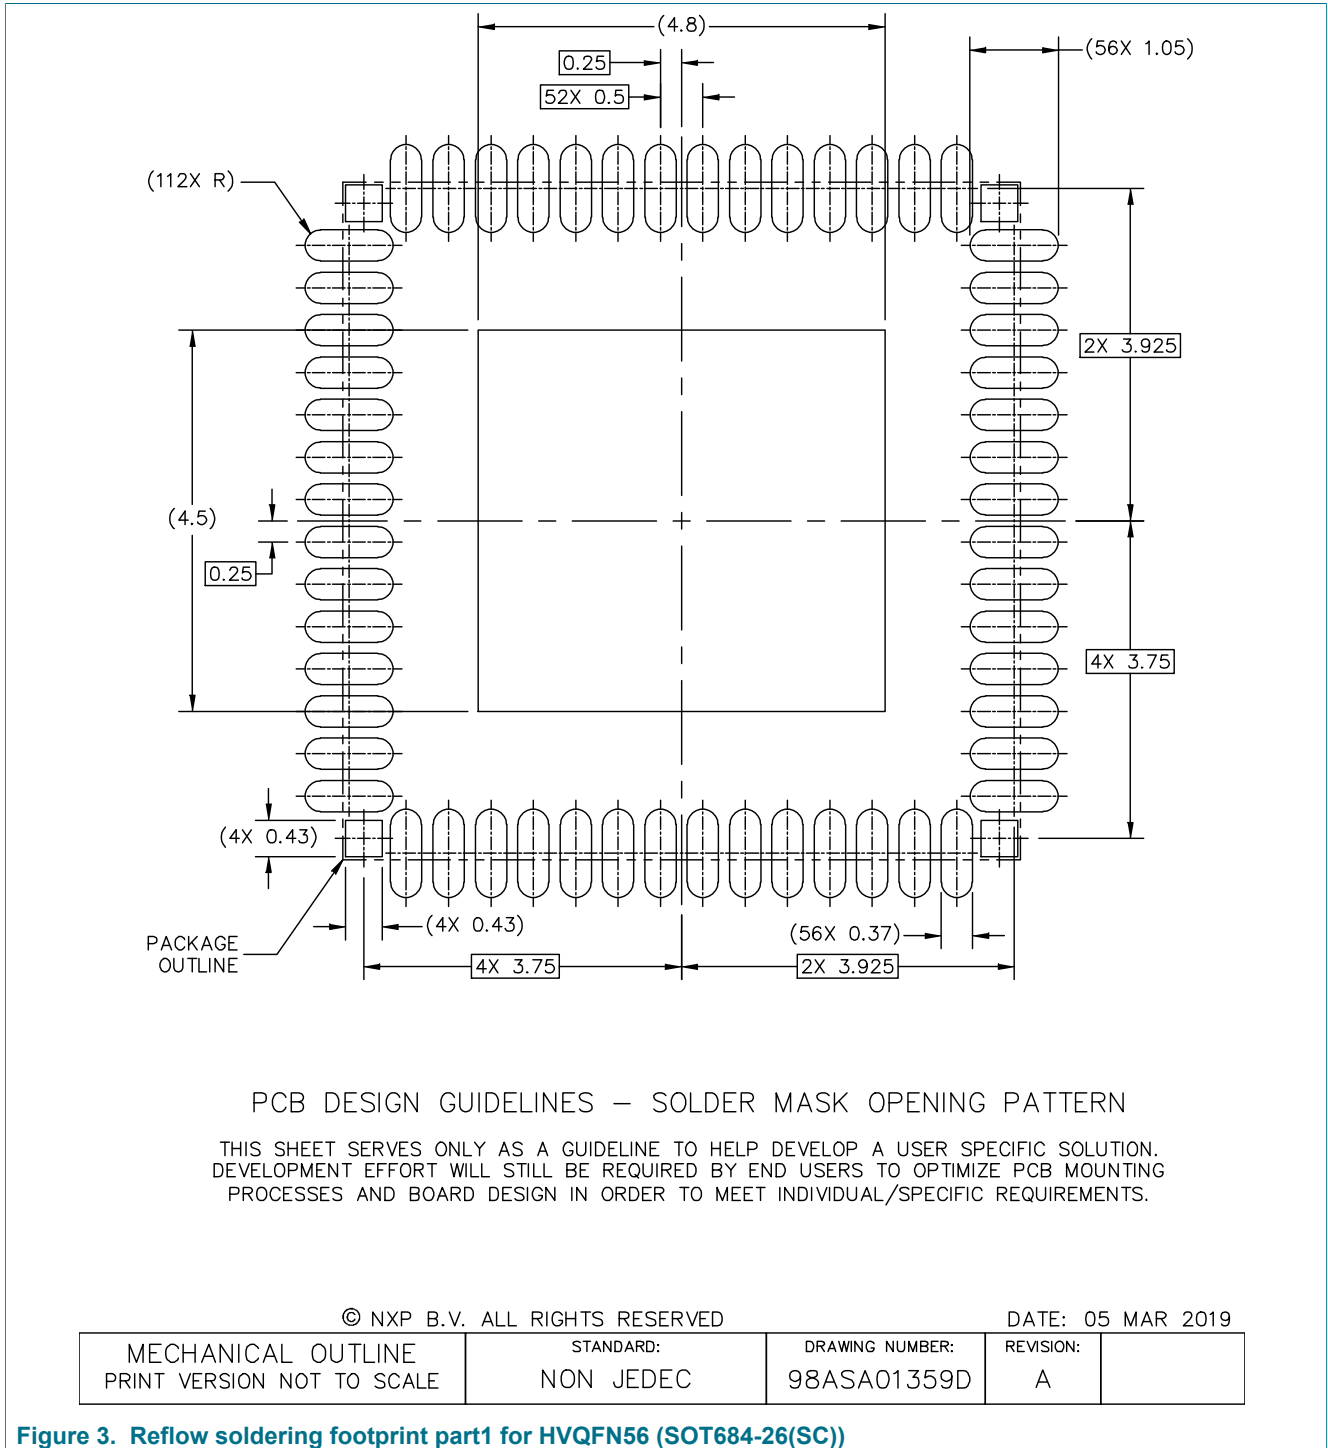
Reflow soldering footprint part1 for HVQFN56 (SOT684-26(SC))
